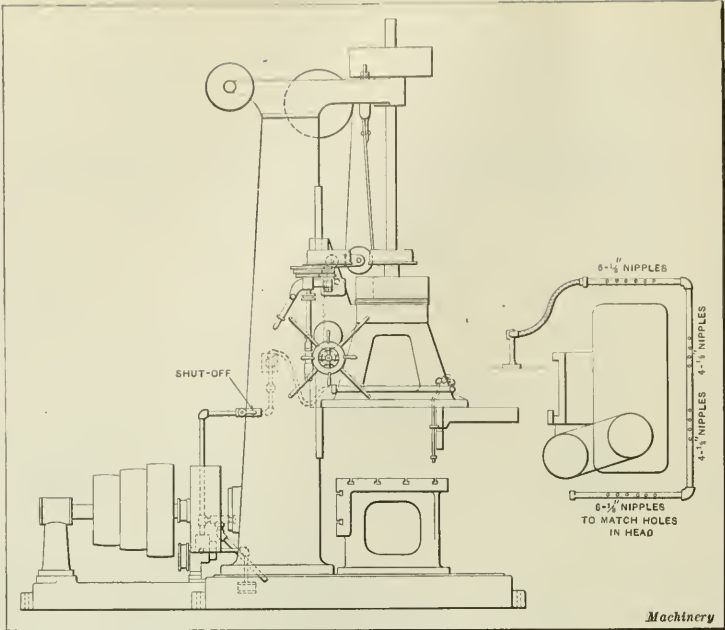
Lubricating System on Baush Multiple-spindle Drilling Machine
